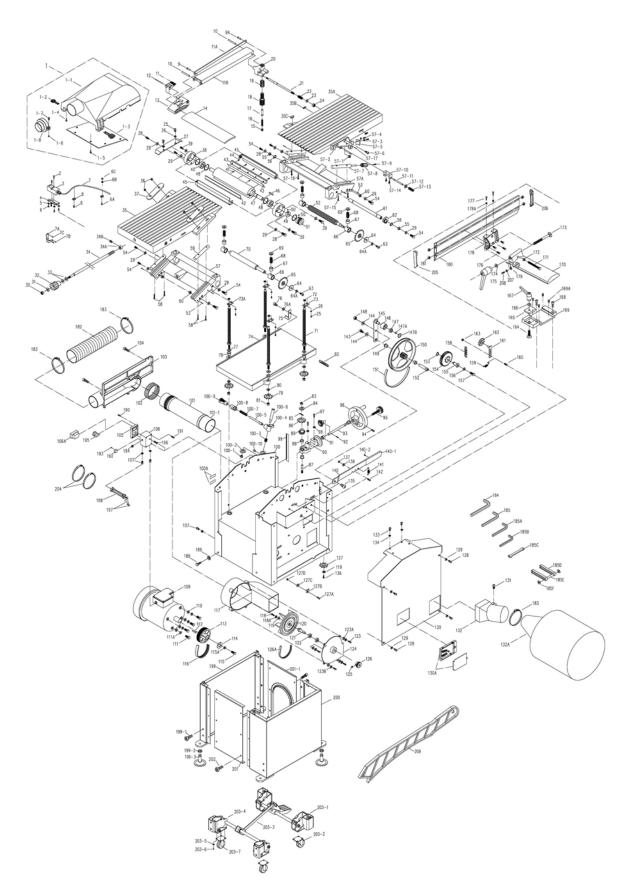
Spare parts drawing Planer-Thicknesser ADH 3050
